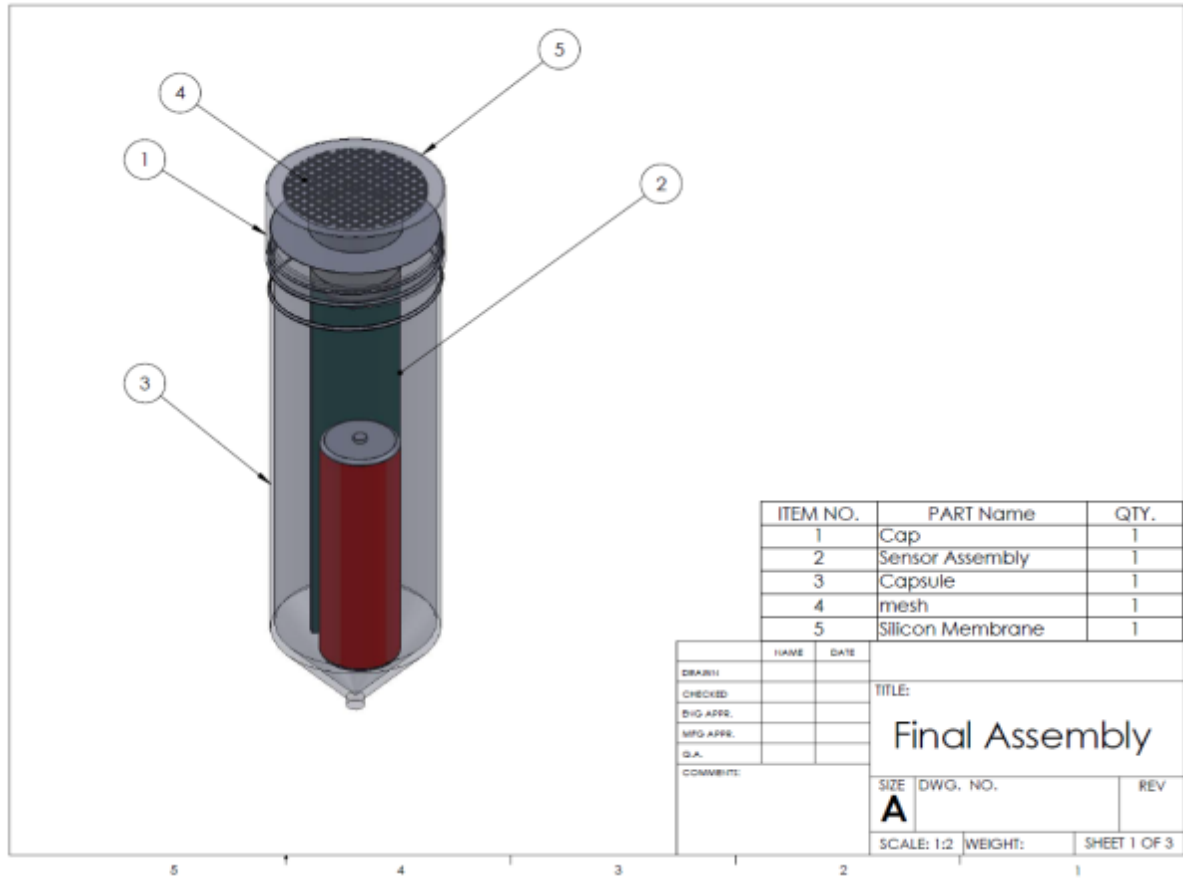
Final assembly design of the current IR gas-sensing device with end-cap, PDMS membrane with supporting metal mesh is mounted onto the front of the gas sensor.
